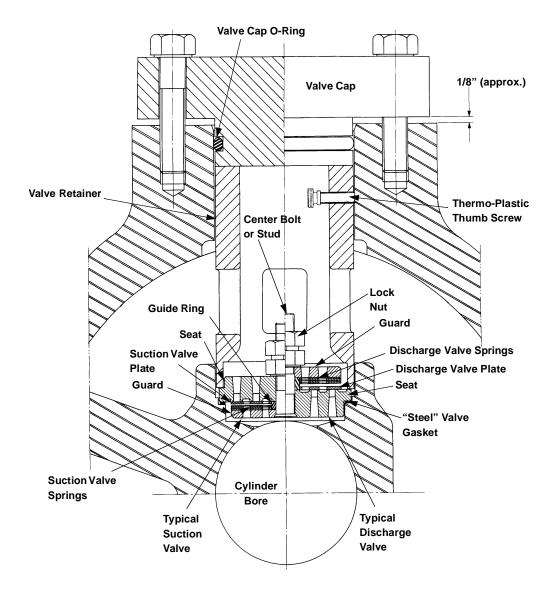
TYPICAL VALVE ASSEMBLIES
